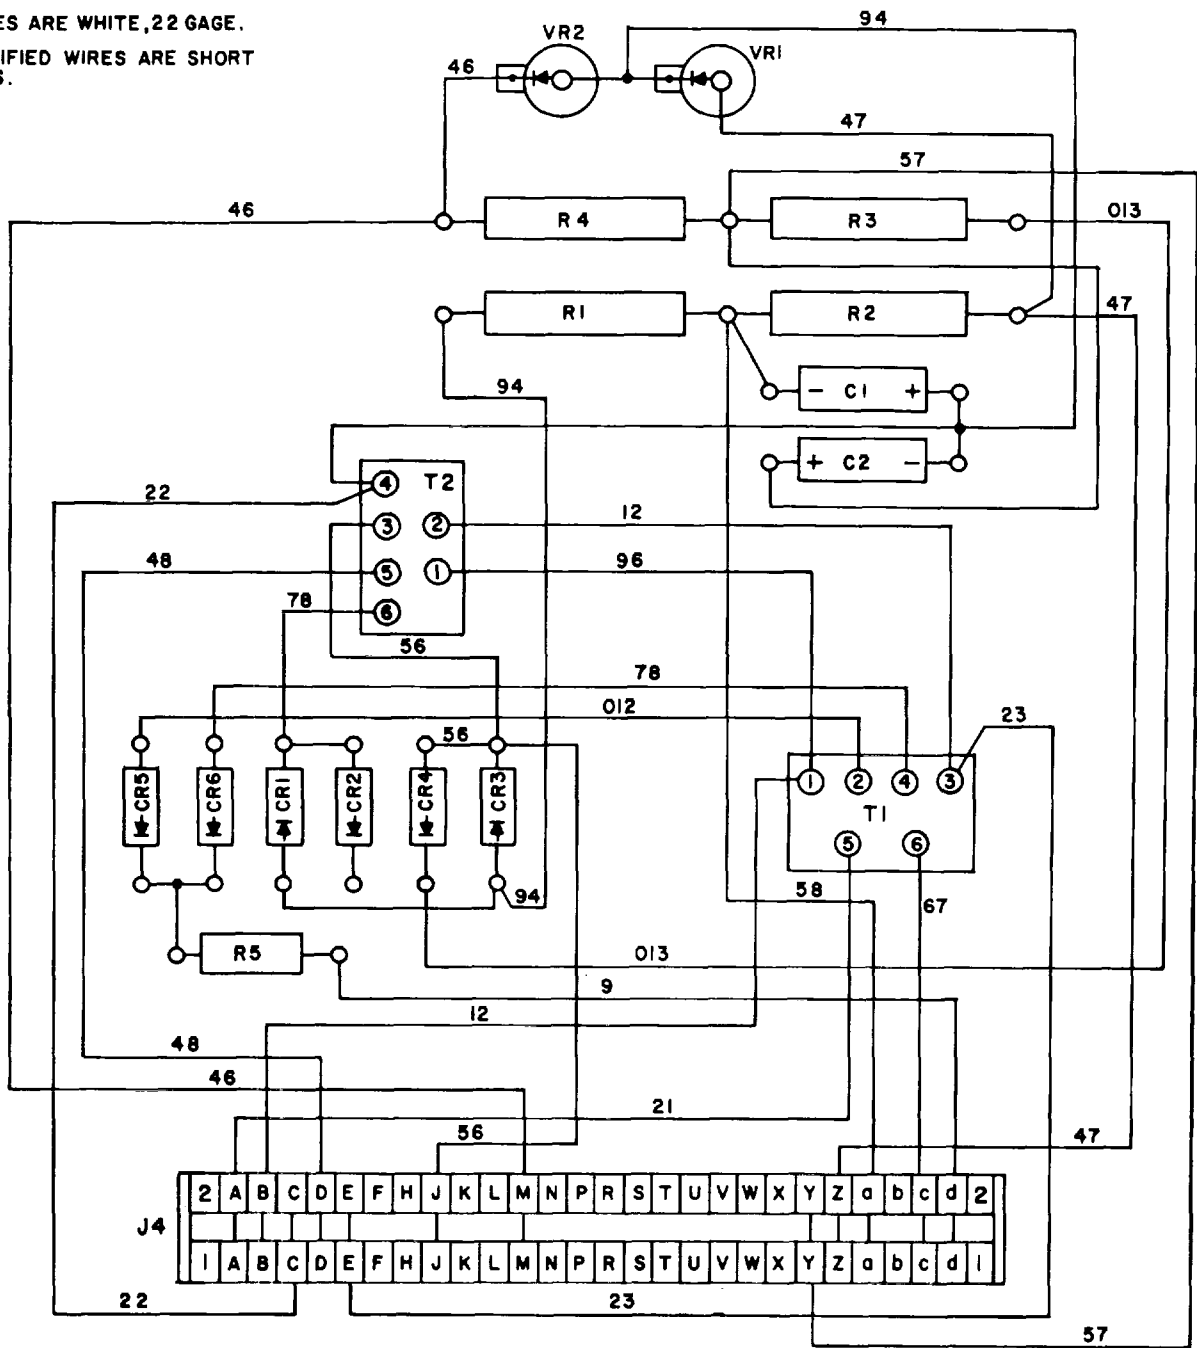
Scan heat sink assembly, point-to-point wiring diagram.
